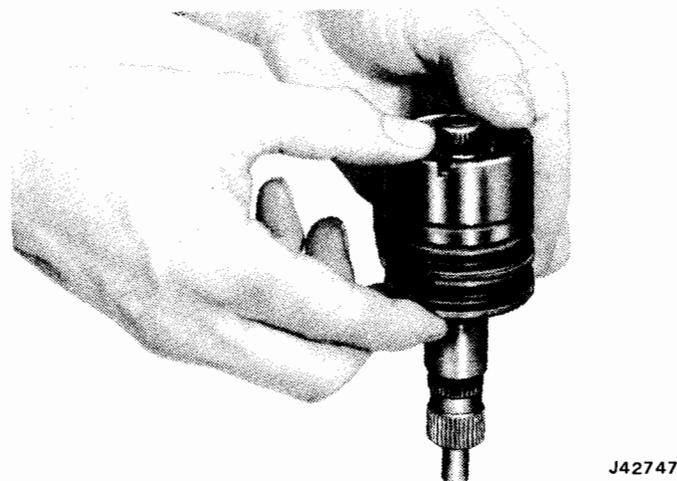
Tapping Torsion Bar to Remove Valve Cap
